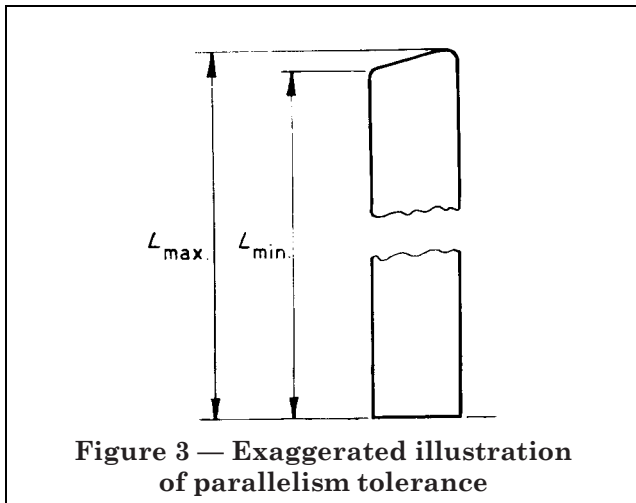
Exaggerated illustration of parallelism tolerance
